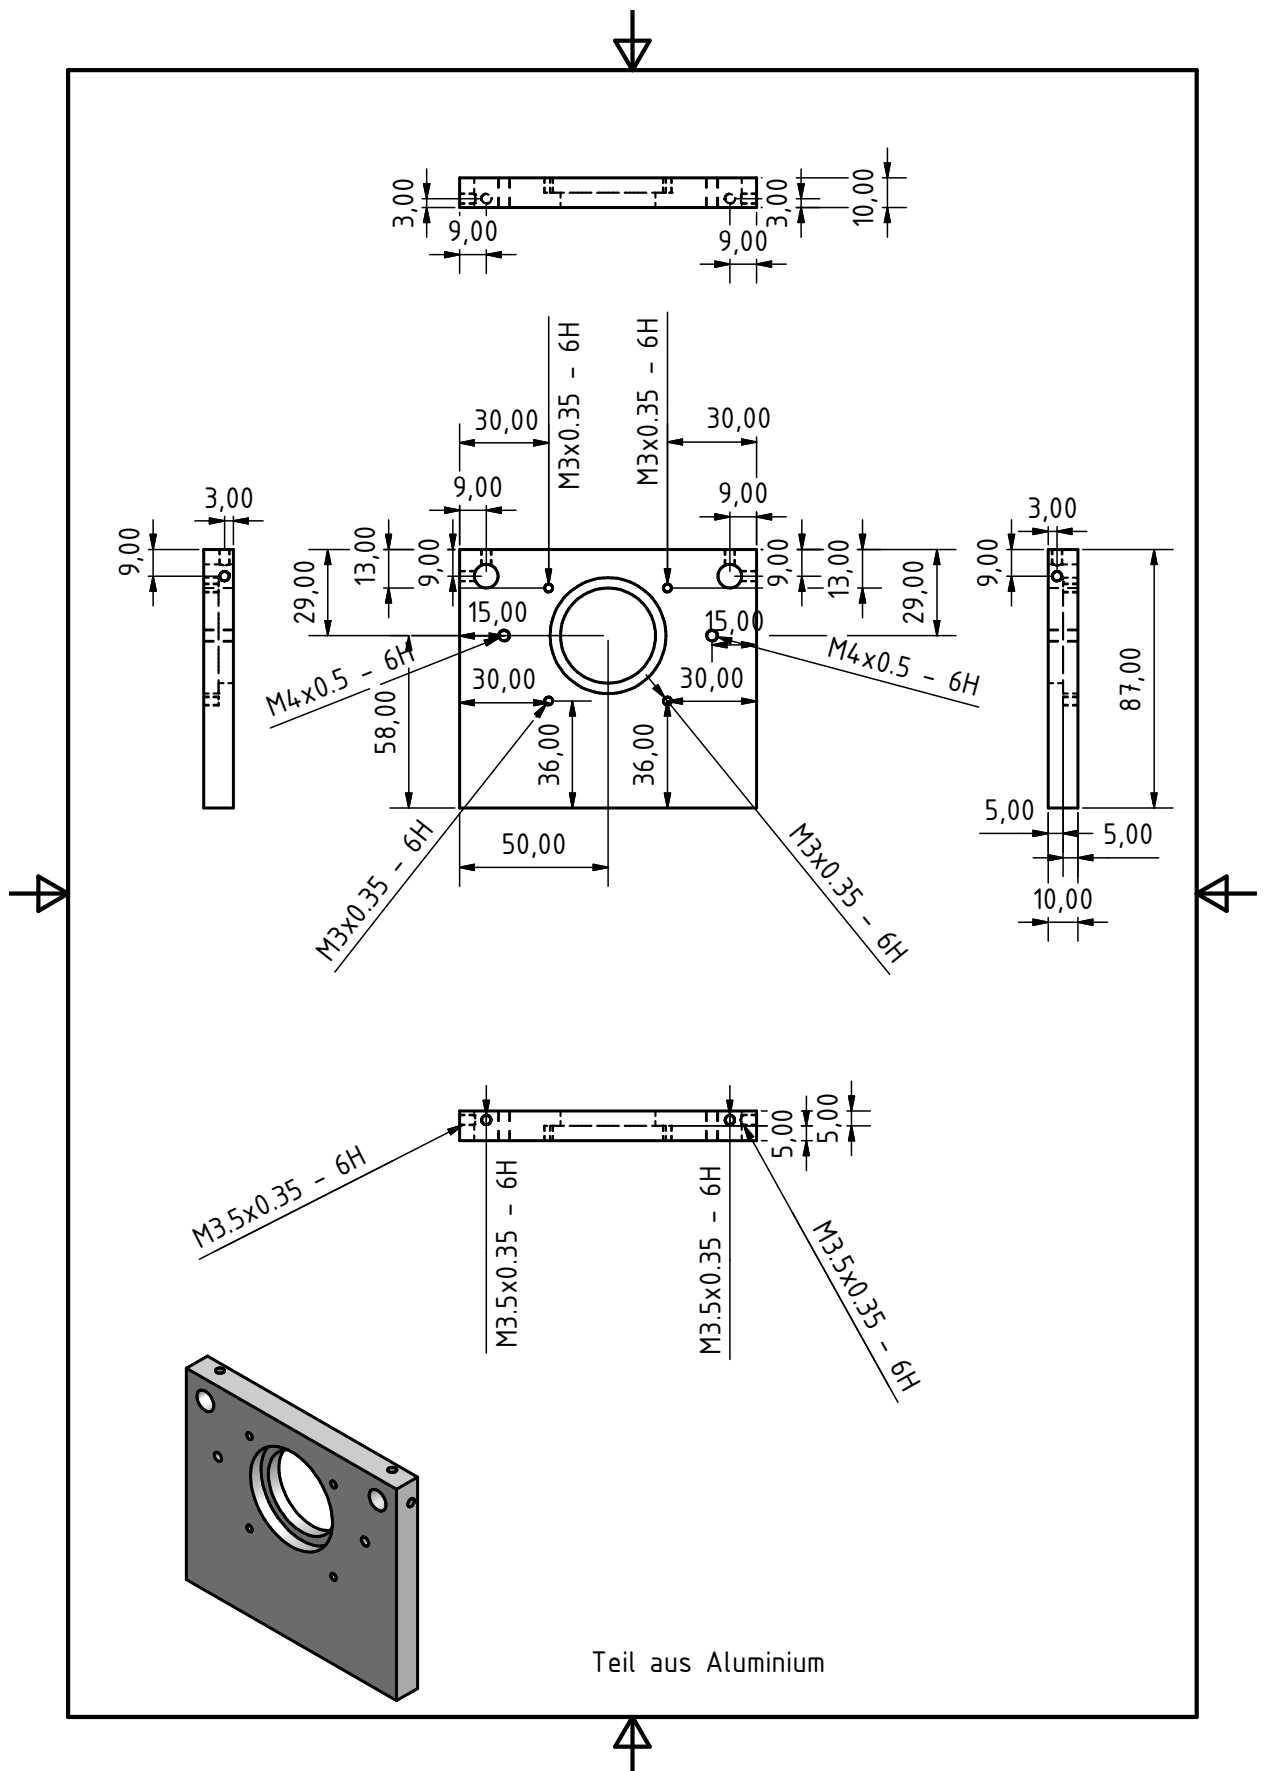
CAD sketch of detector interference filter holder part and socket for teflon inset. A box with the detector electronics is fixed with two screws to the back side of this part.
